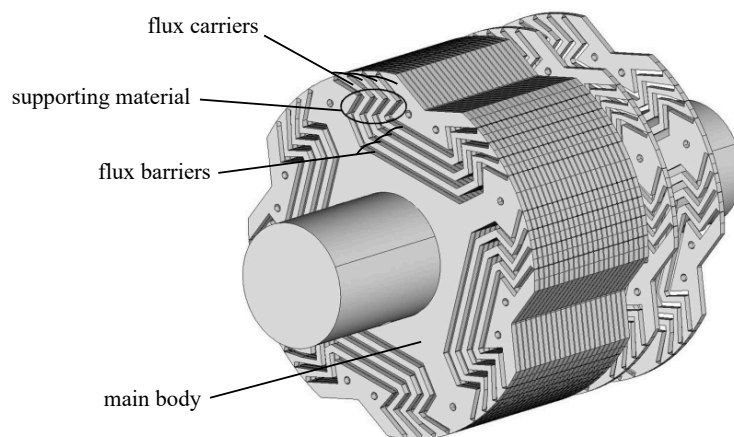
A sketch of a dovetail TLA rotor design [29], [31] (edited).
